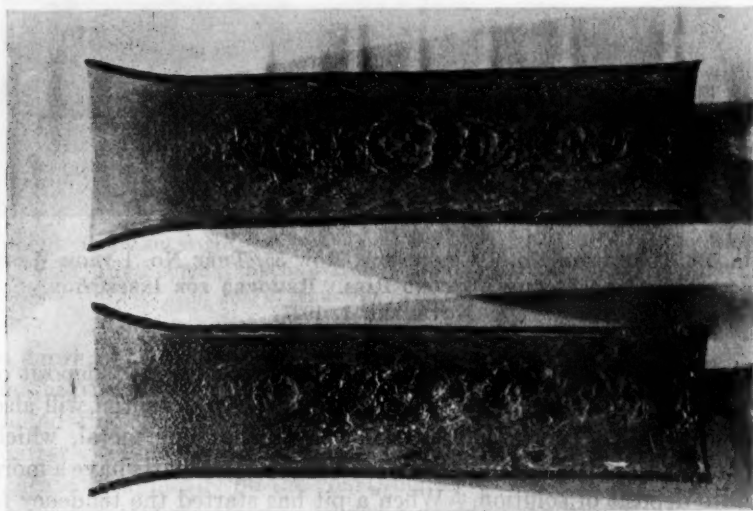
INLET ENDS OF TUBE NO. 6, AND TUBE 18, ROW 4, EAST BOTTOM SECTION NO. 9 CONDENSER. REMOVED FOR INSPECTION JANUARY 3, 1928
